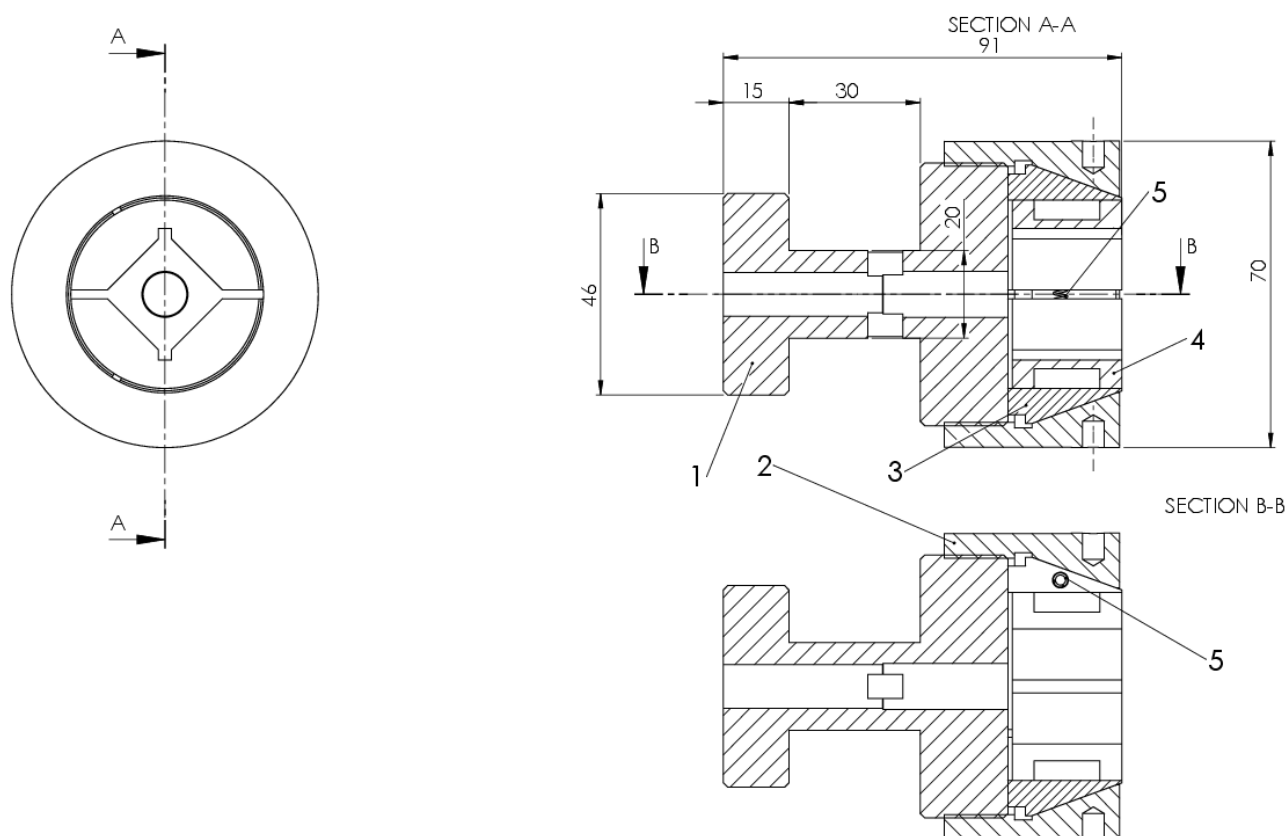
Device for gripping and testing of samples taken from butt-welded pipes; 1 – body, 2 – nut, 3 – jaw, 4 – middle bushing, 5 – spring.
